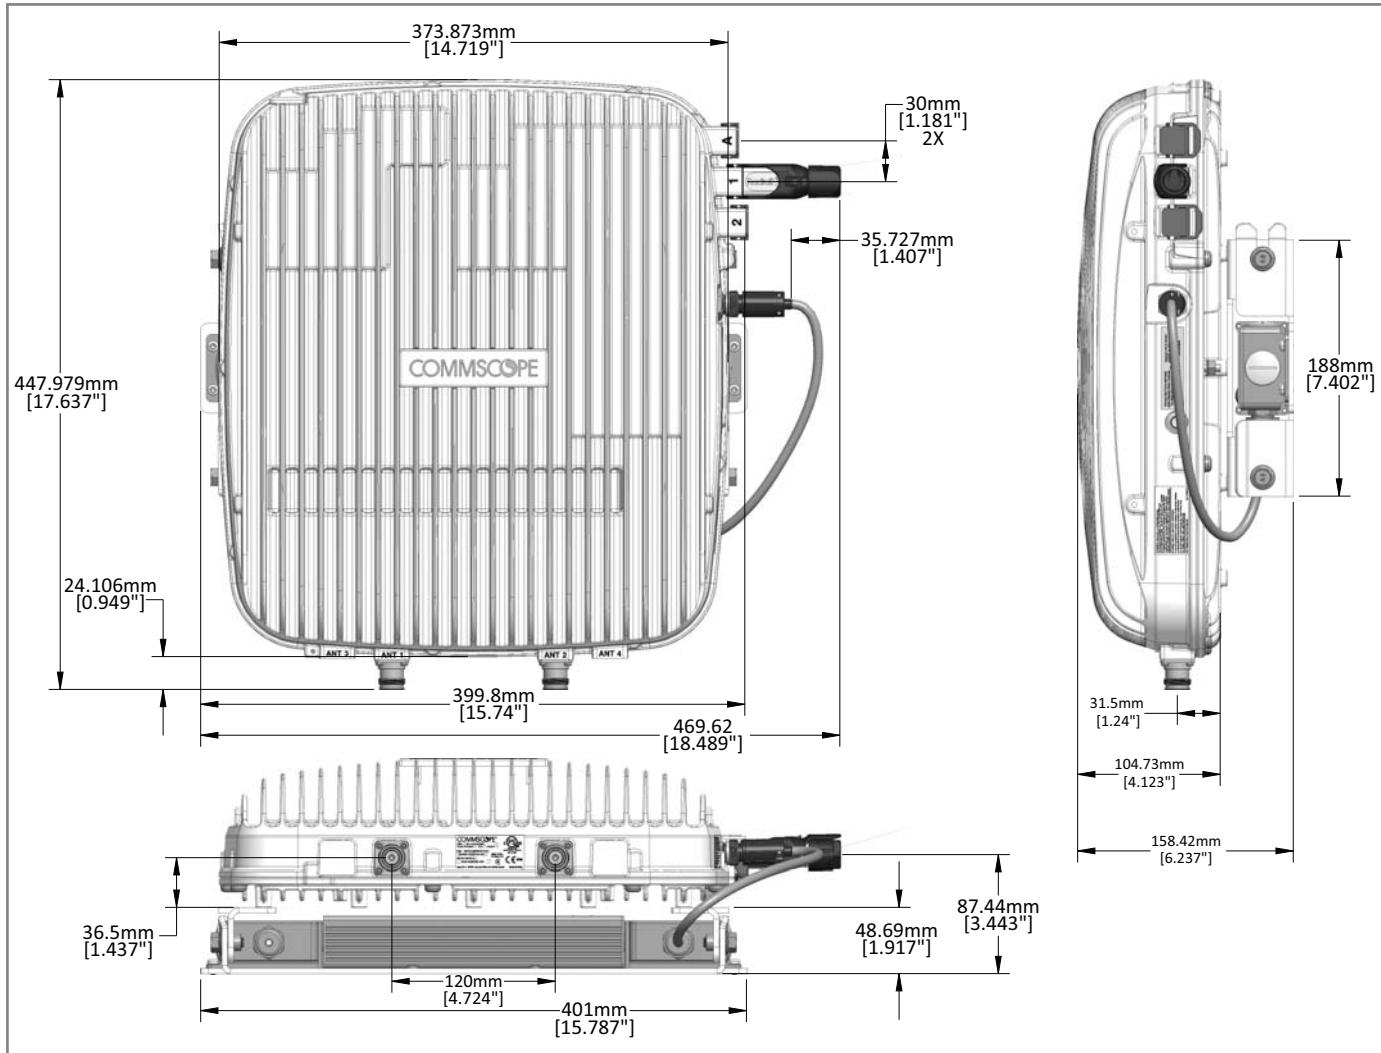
Mounting Dimensions for a CAP L Mounted with the AC/DC Power Supply Kit
